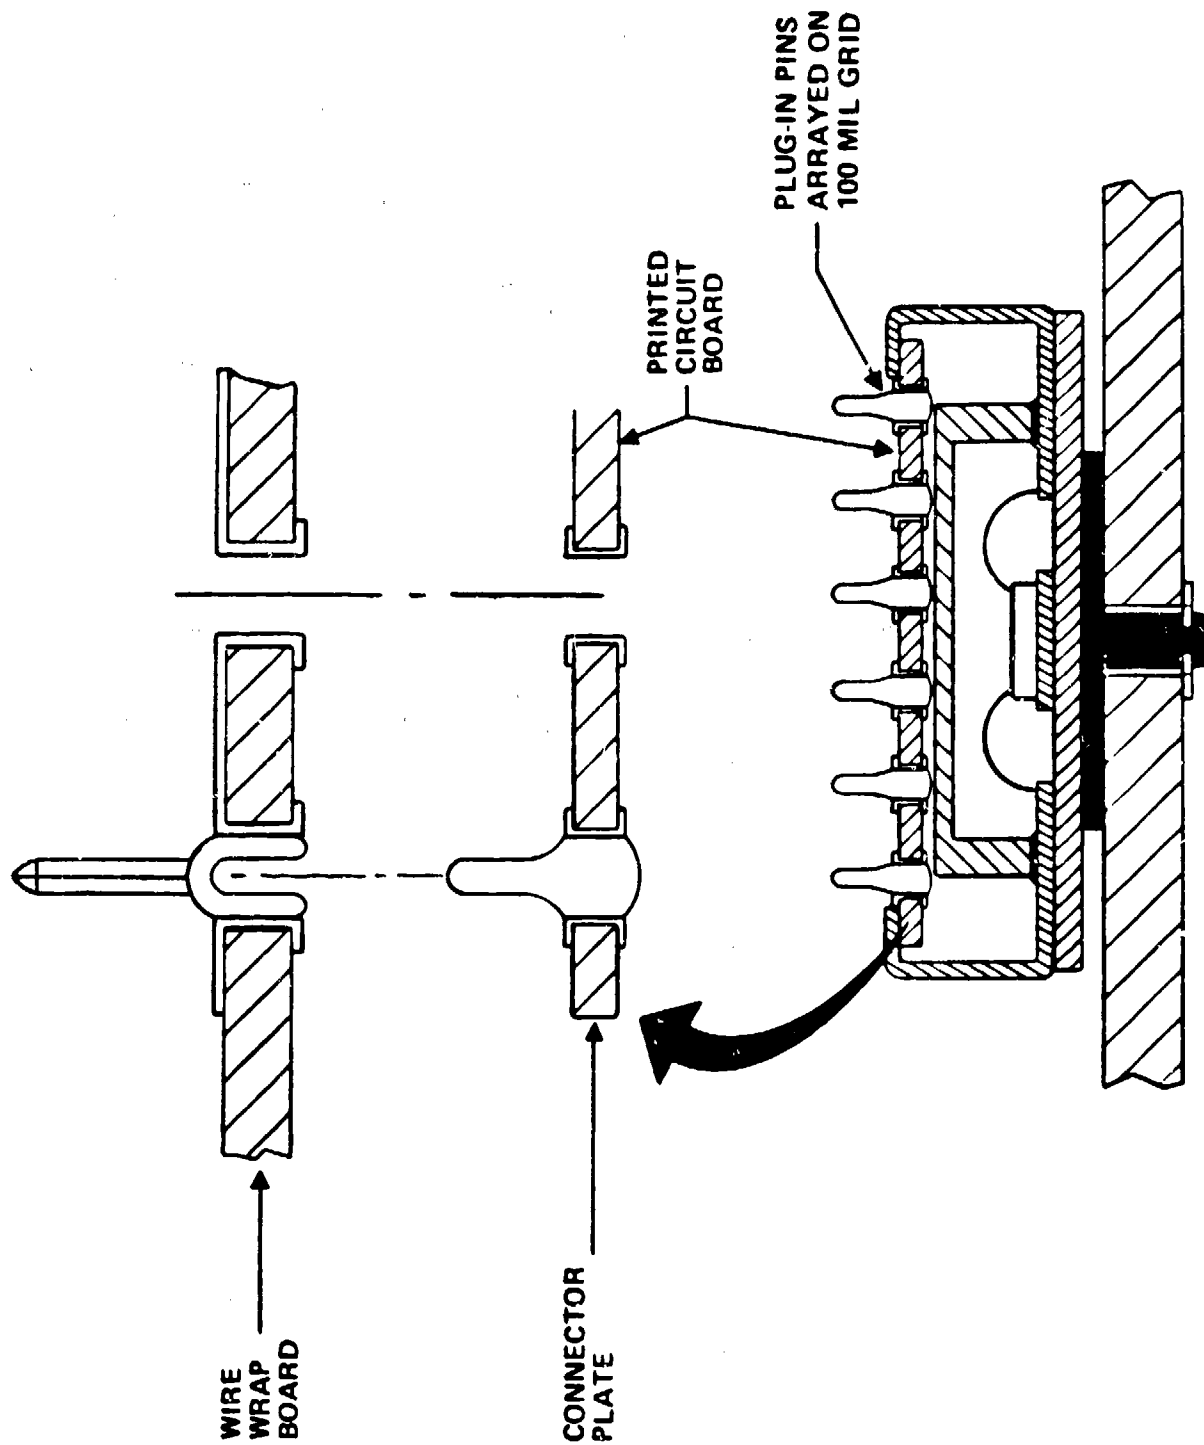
Pin Grid Array Application of DB Cu - HCC, Shown as a Plug-in Package into a Wire-Wrap Board
